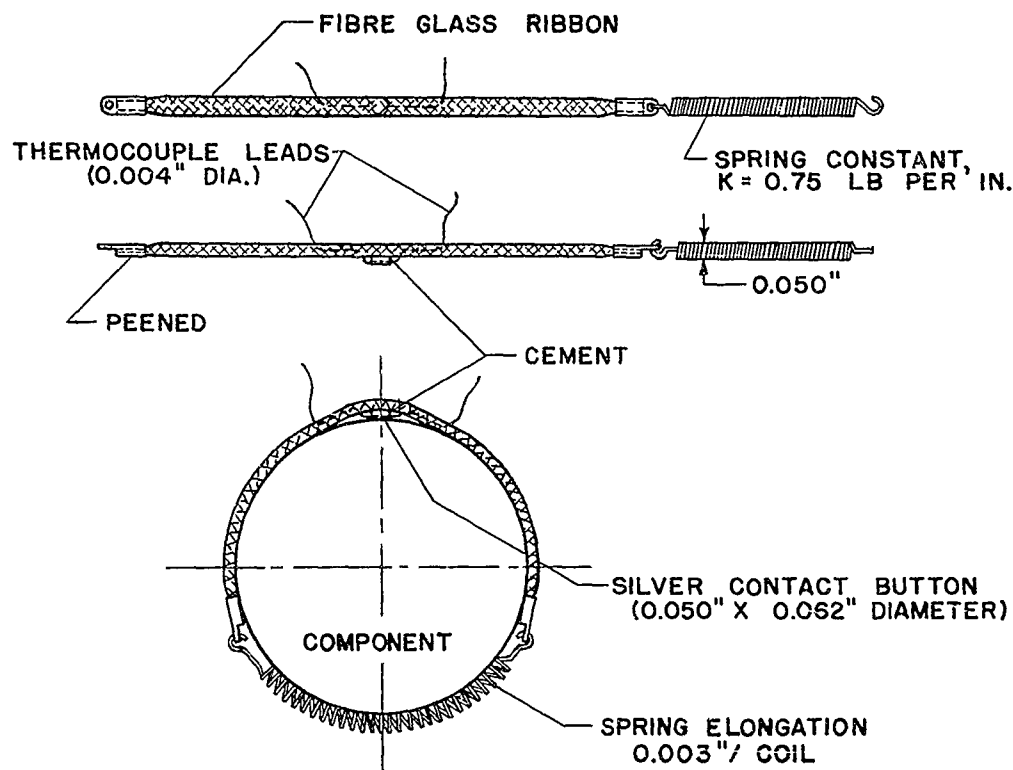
Removable Thermocouple Element for Surface Temperature Measurement
